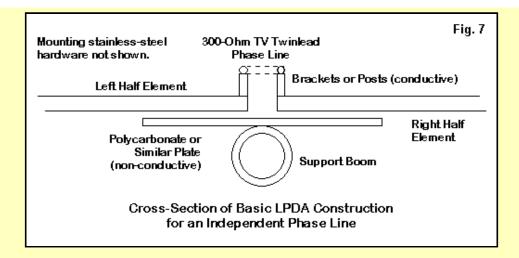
is provided mostly as a reminder for these notes, but not as a detailed drawing of all of the details.
